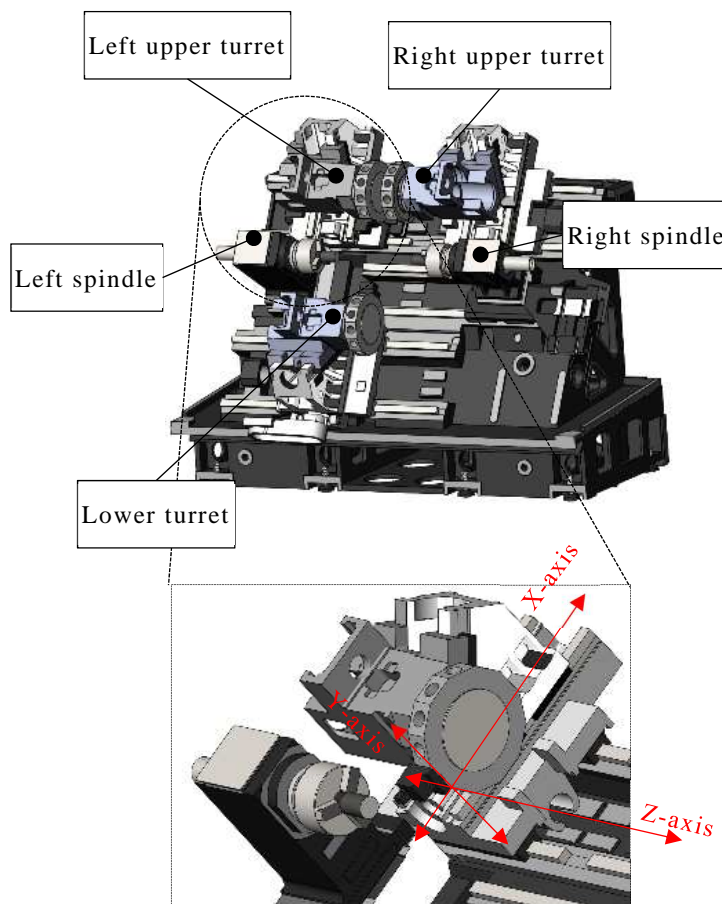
Basic structure of multi-turret type multi-tasking machine
